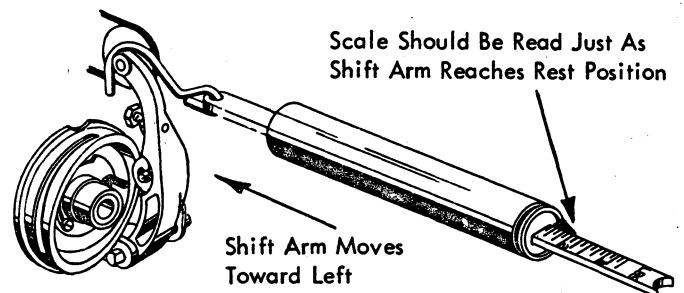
Spring Scale Measurement For Rotate Spring Adjustment
